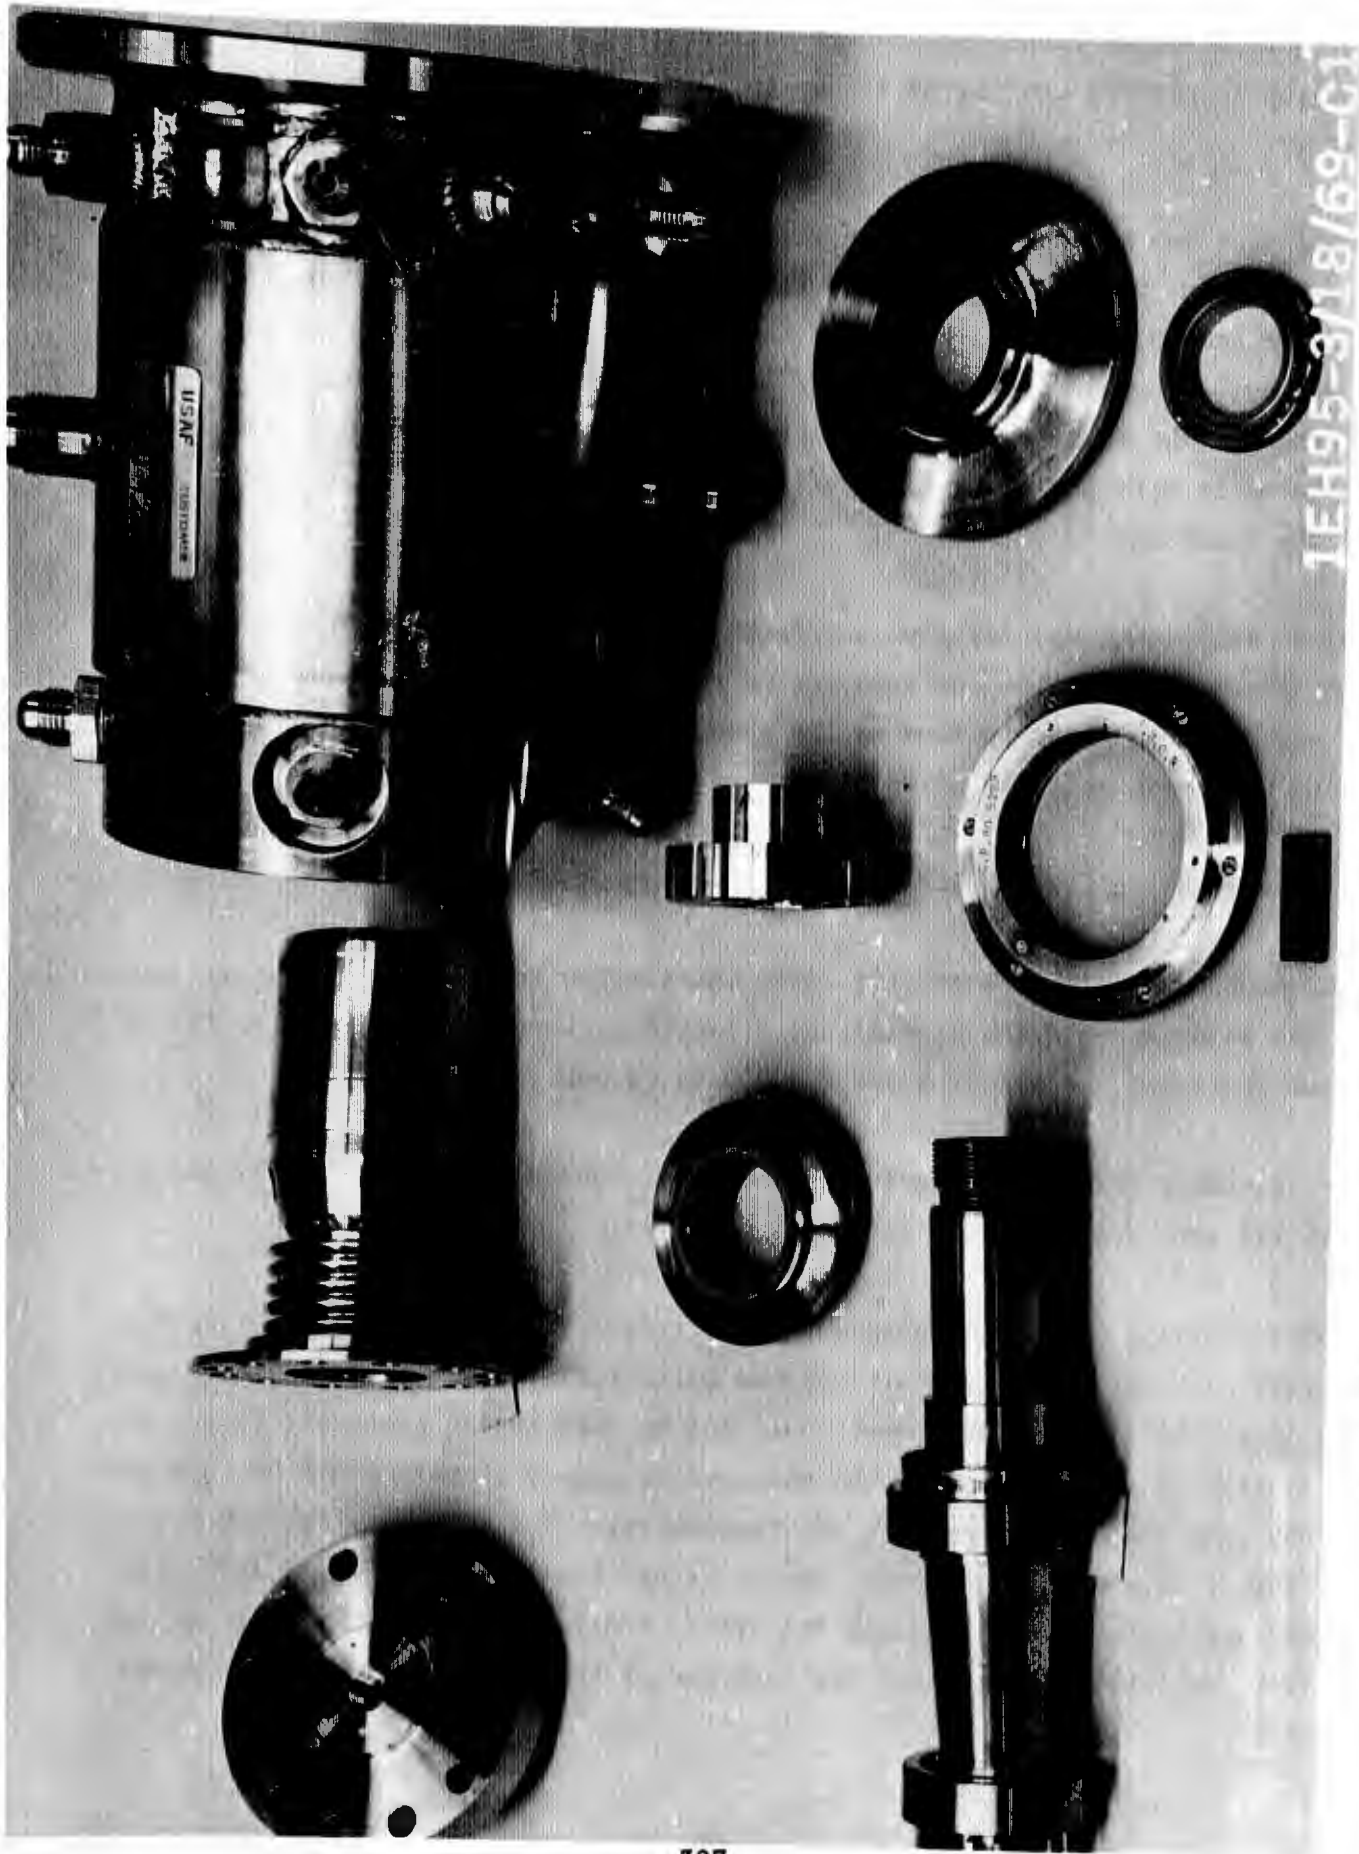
Main Oxidizer Pump Bearing and Seal Tester Major Components (U)
